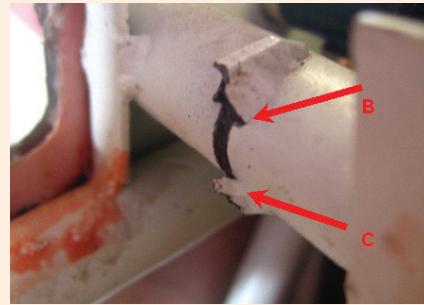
Right-side view. (Right is forward) Elevator and bracket removed. Weld was incomplete on the right side as well. (B) Also notice cold-weld area where bracket broke away from weld material. (C).
